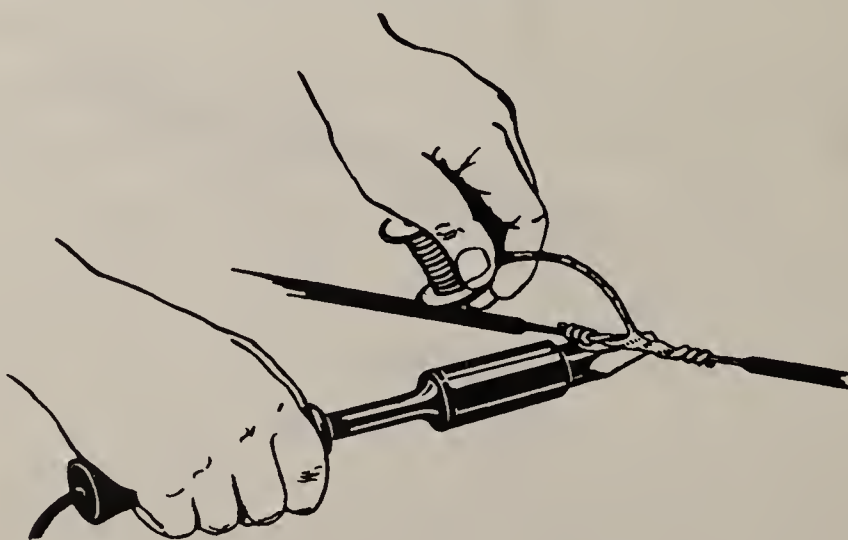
Method of wire soldering. To make a soldered joint of this type, clean and twist the wire together as illustrated. Apply flux and hold surface of tip against twisted wires. Apply solder to heated work from the top, thus permitting the fluid solder to flow between the wires by action of gravity.
